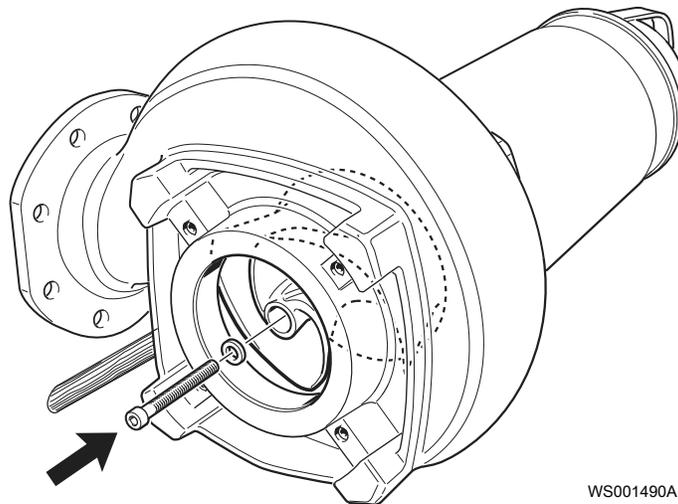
Hand-tightening the impeller screw. Generic drive unit shown.
